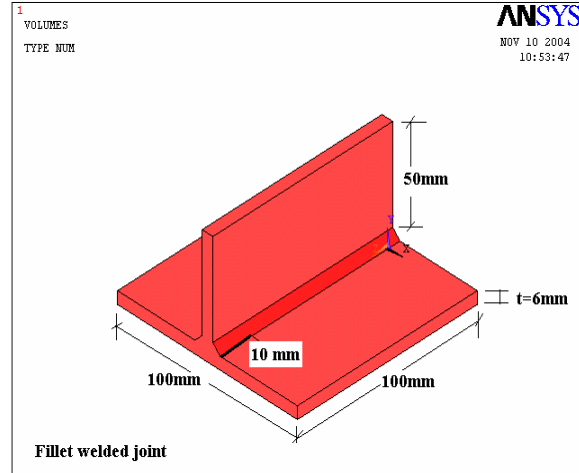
Fillet welded specimen with initial crack of 10mm
